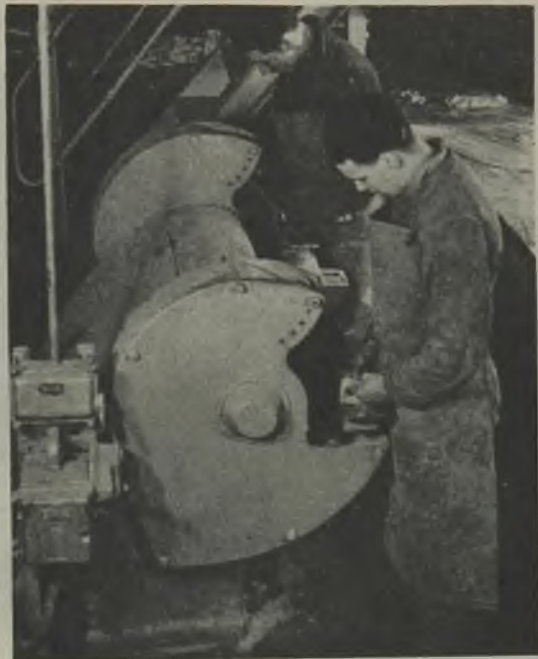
CASTINGS BEING TRIMMED ON “LUKE AND SPENCER” DUPLEX “DOUBLE-ENDED” GRINDING MACHINE.
